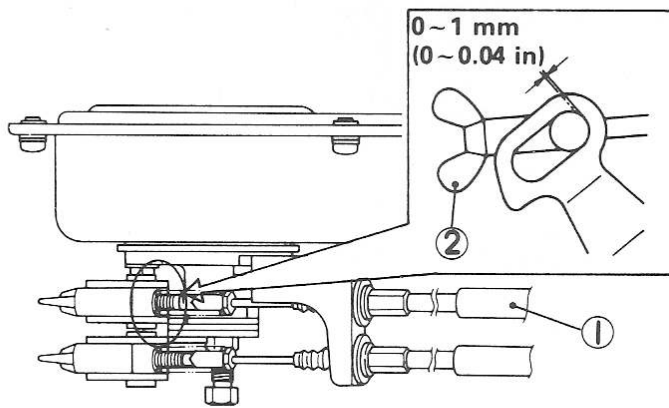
Turn the brake pedal cable (1) adjuster (2) until the specified gap exists between the cable fitting and the lever slot (Sec 23)
